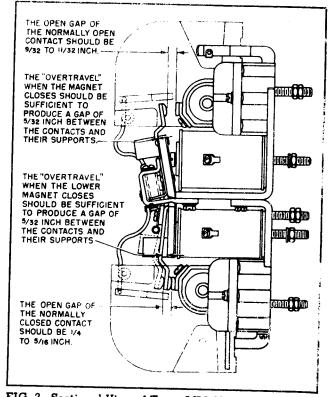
Sectional View of Types MM-311, 411 Contactors
